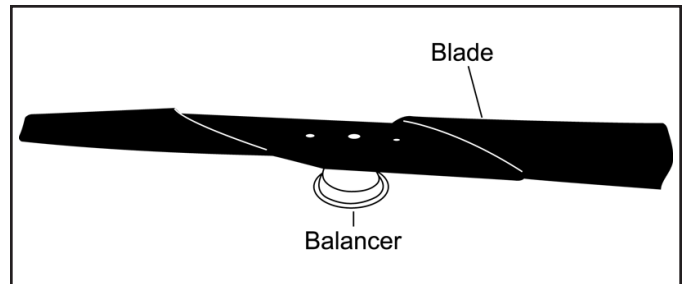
Checking the Balance of a Lawn Mower Blade With a Balancer
